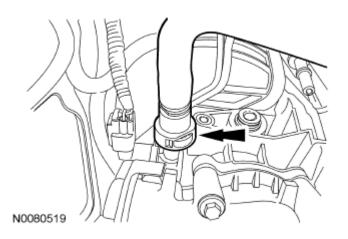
Locating Fuel Supply Tube Quick Connect Coupling Courtesy of FORD MOTOR CO.
